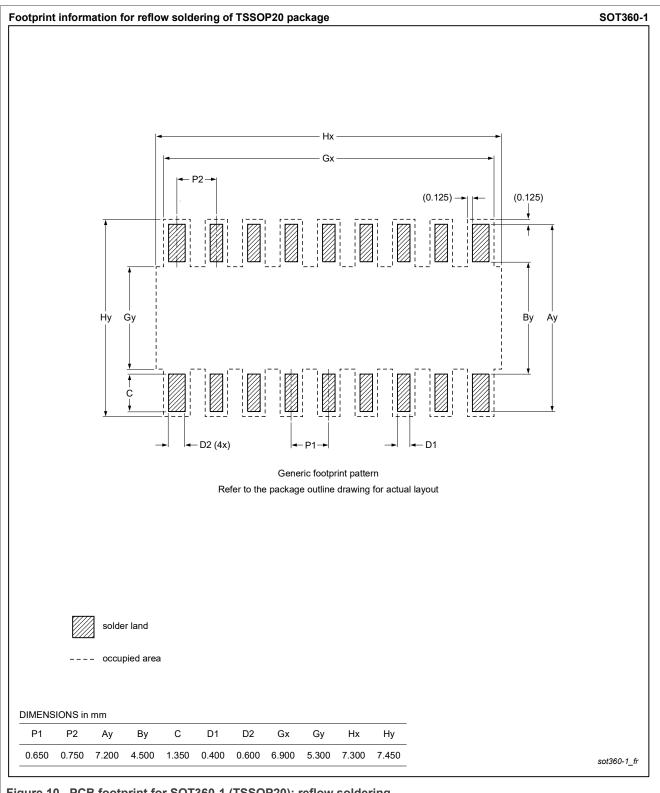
PCB footprint for SOT360-1 (TSSOP20); reflow soldering
